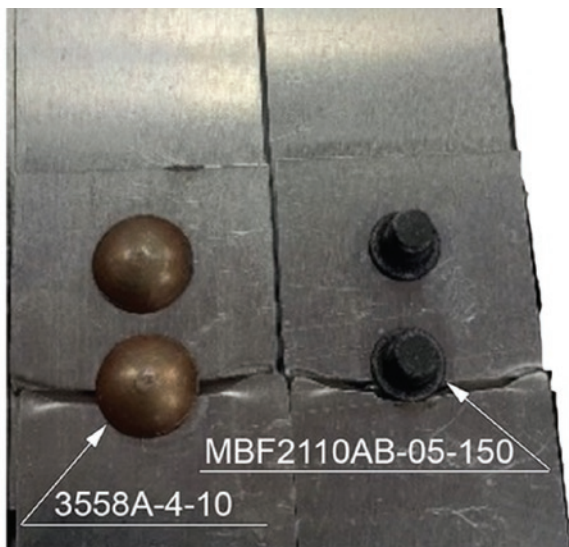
View of lap joint damage for two types of fasteners (3558A-4-10 and MBF2110AB-05-150)
